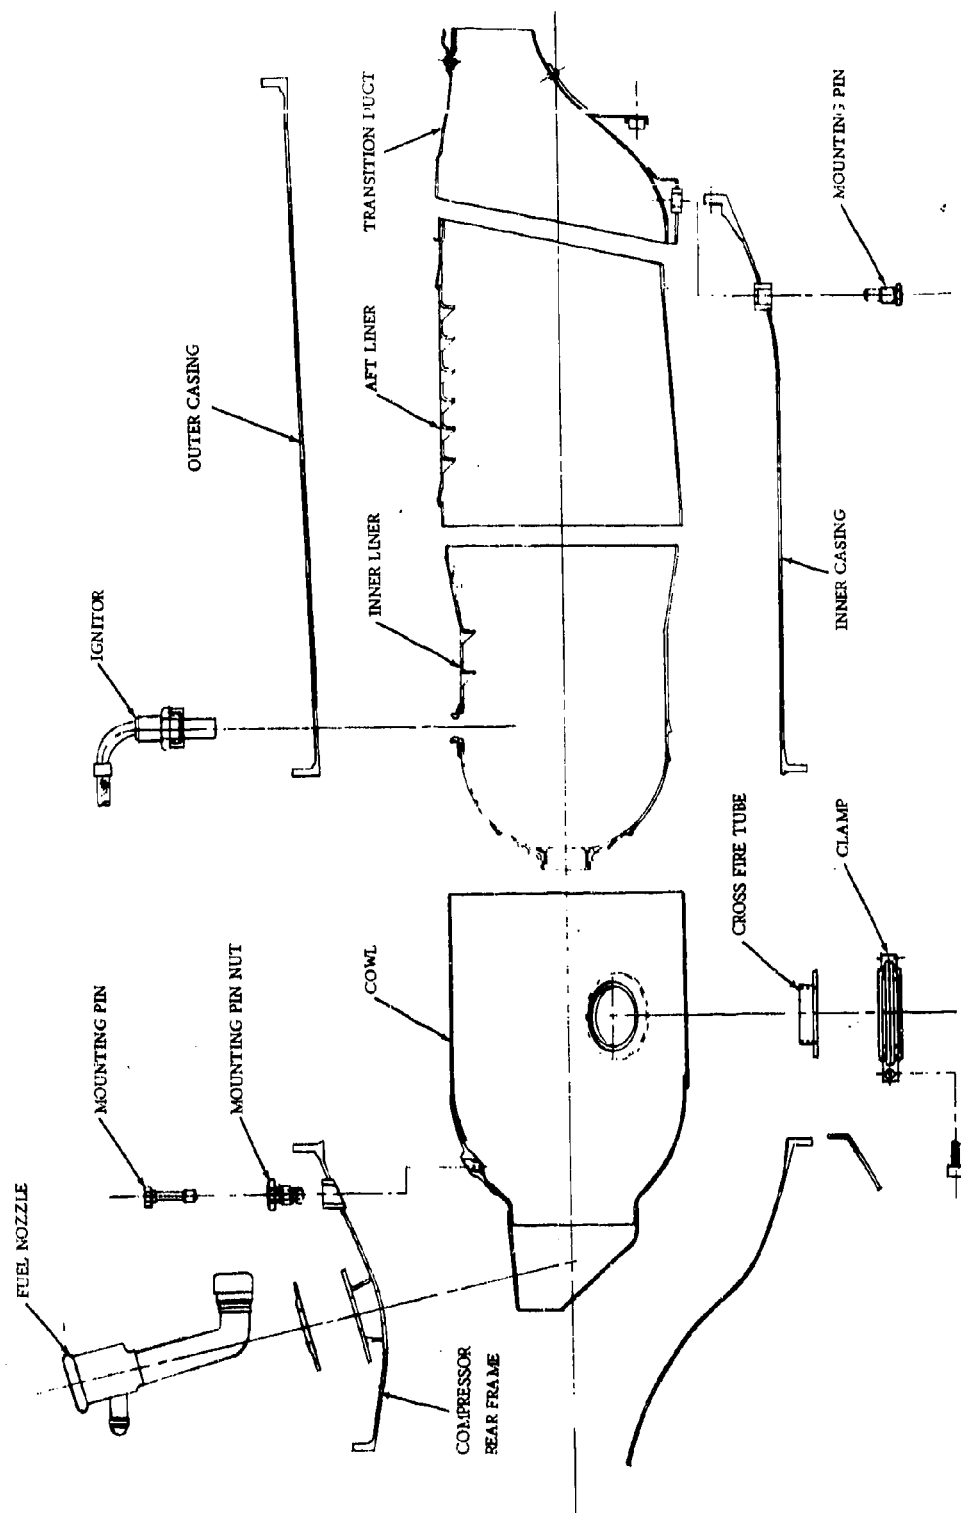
CJ805 COMBUSTOR COMPONENTS
